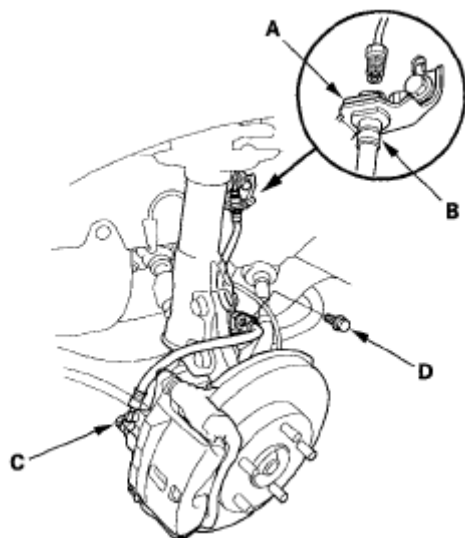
Removing And Discarding Brake Hose Clip (Clip Type)
